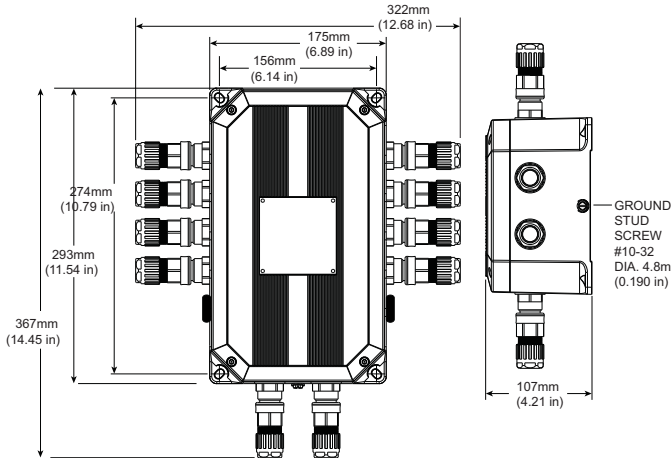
Device Coupler DIN-Rail Mounting Installation Dimensions (Base Units).
